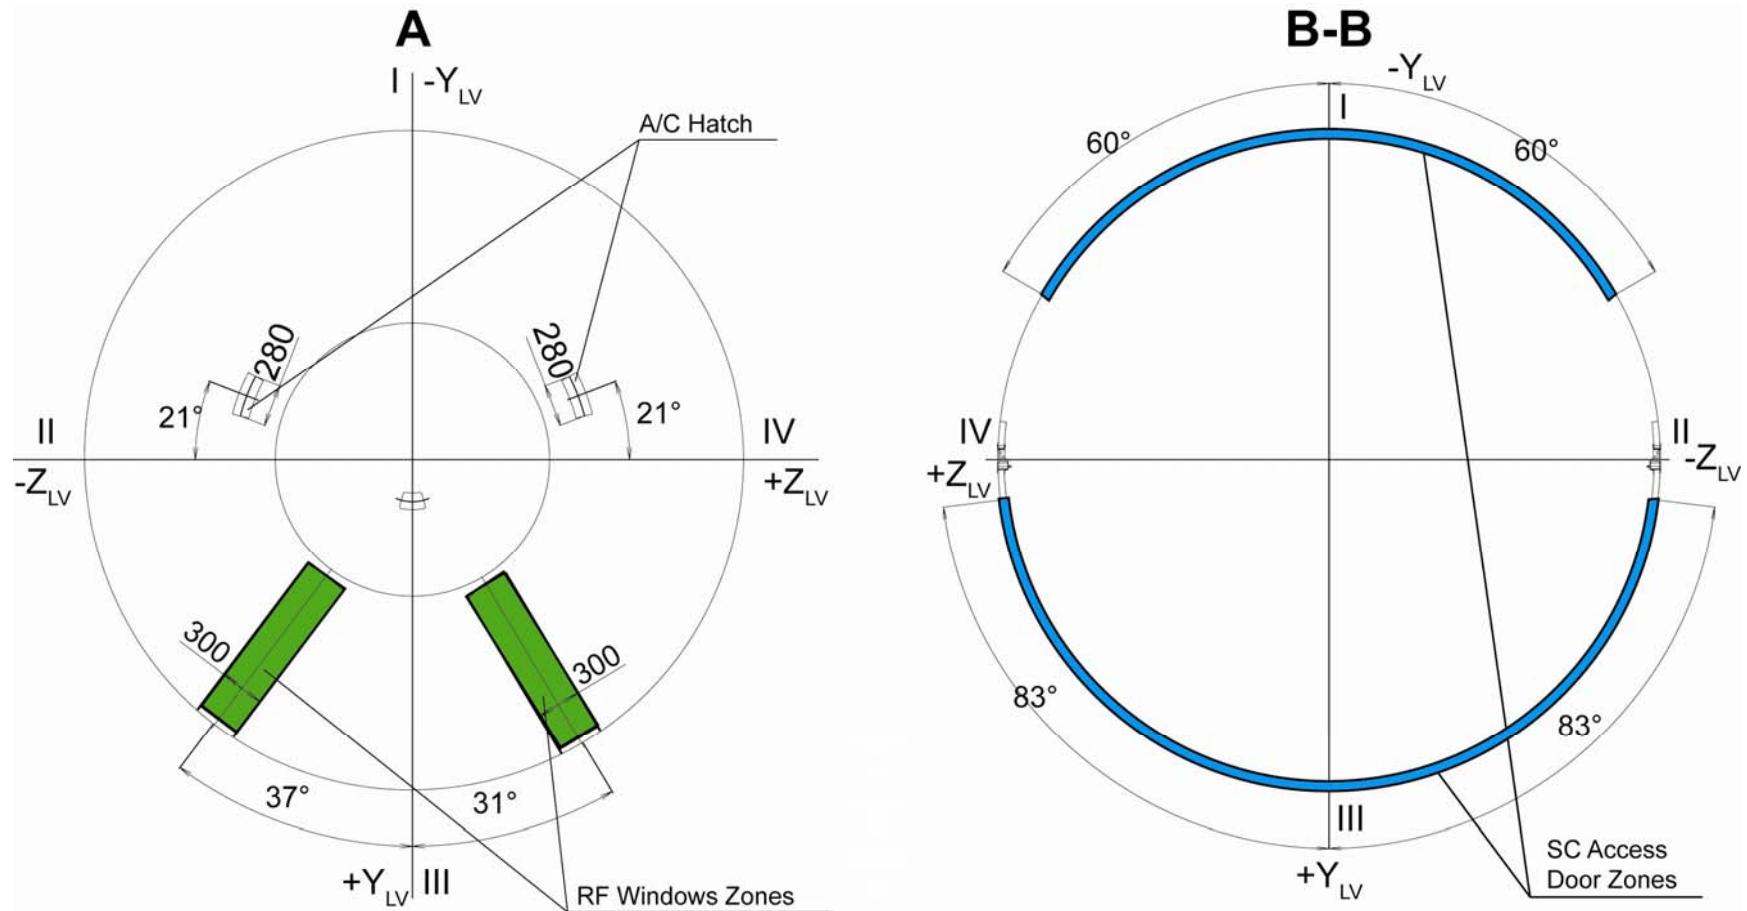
Proton Breeze M PLF-BR-15255 Commercial Fairing General Layout (Sheet 1 of 2)
